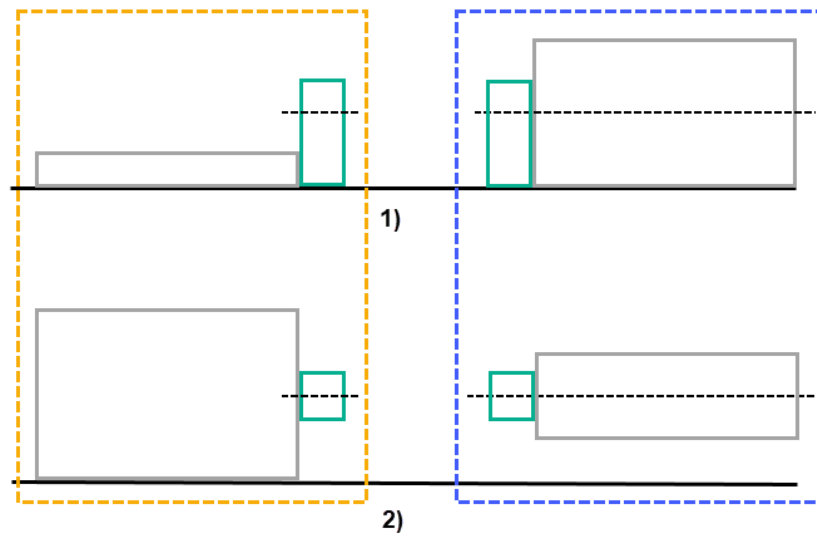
Welding station sketch of rotary friction welding machine in company “X”: 1) front view; 2) top view
